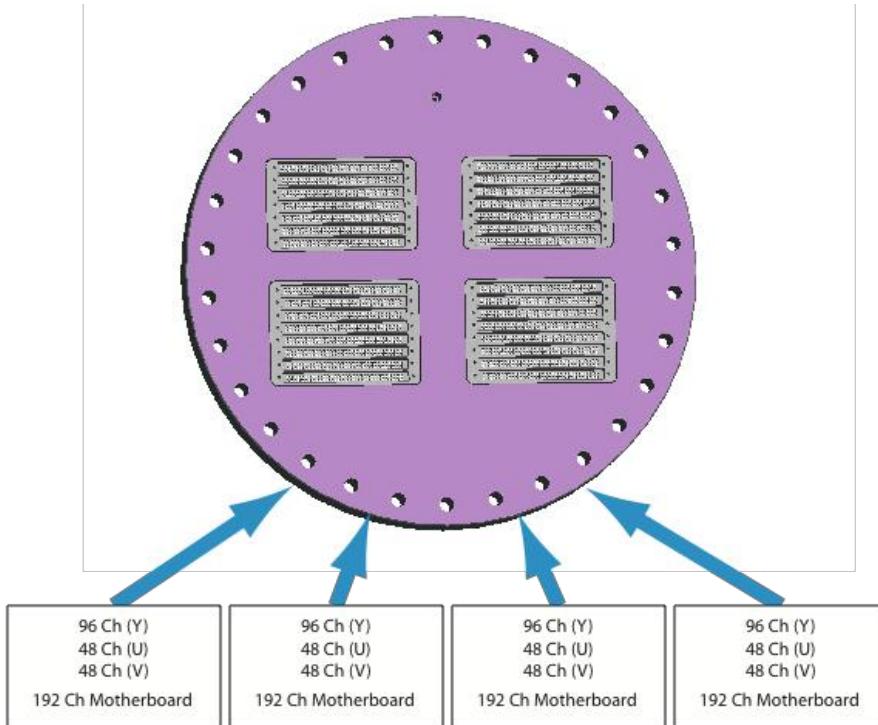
Signal feedthrough flange consisting of a 14-inch CF flange with two 8-row and two 7-row pin carriers welded in place.
